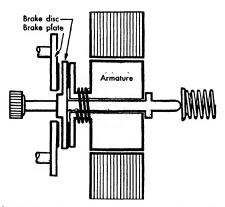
A schematic drawing of brake operation. View B: Motor running, brake surfaces disengaged. (Courtesy Minneapolis-Honeywell Regulator Company)
